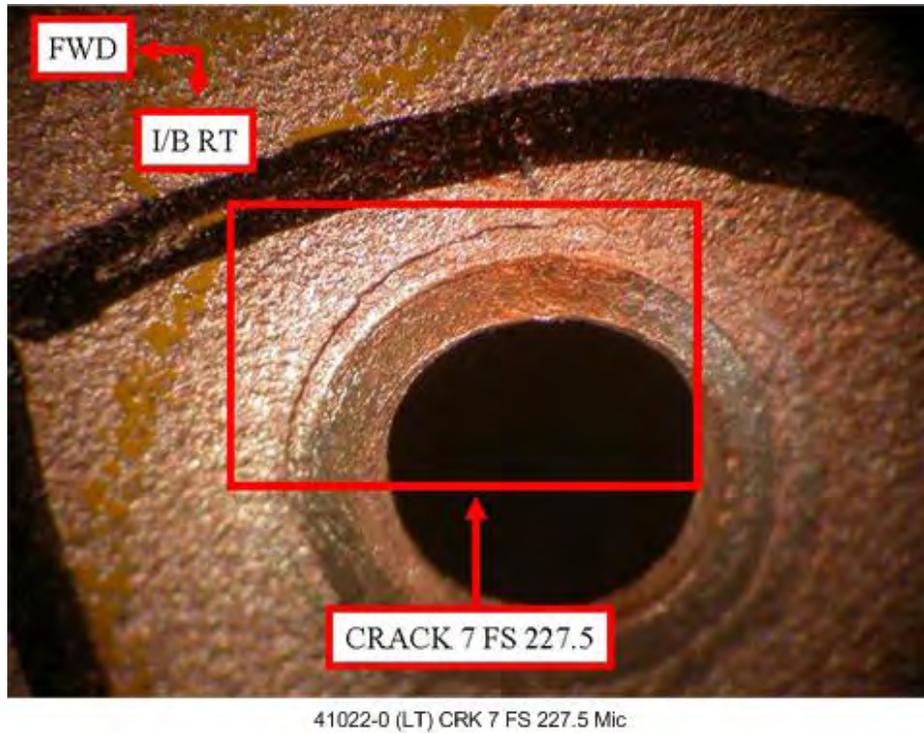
Microscopic View of Crack 7 on the Left Inboard Floorboard Support Assembly FS 227.5
